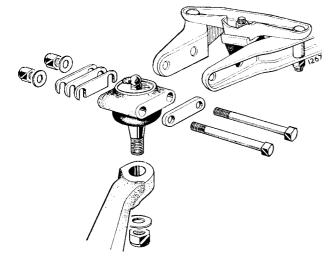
Removal of the Upper Wishbone Ball Joint.
